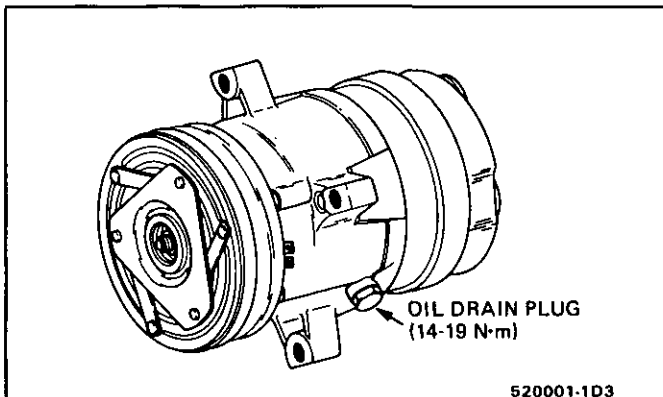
V5 Compressor, V-Groove Pulley & Standard Mounting
